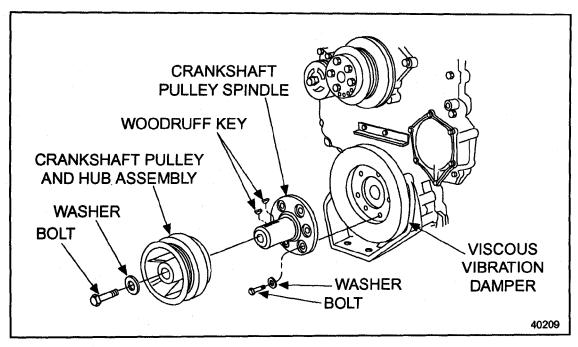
Crankshaft Pulley and Hub Assembly Installation with Spindle
